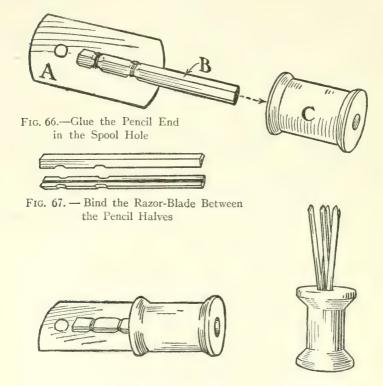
The Ripper Fig. 64 — A Toothpick Holder
